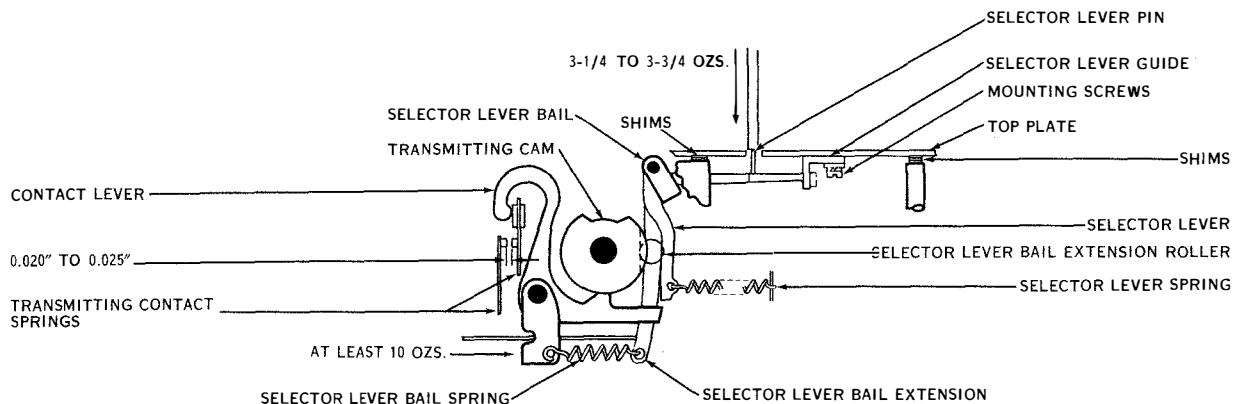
Transmitting Contact Gap and Selector Lever Spring Tension
